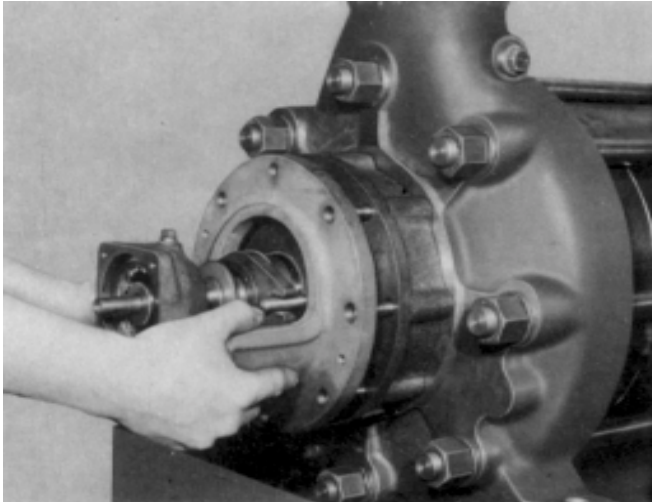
Removing the bearing housing (350) together with outer race of cylindrical roller bearing (322).
